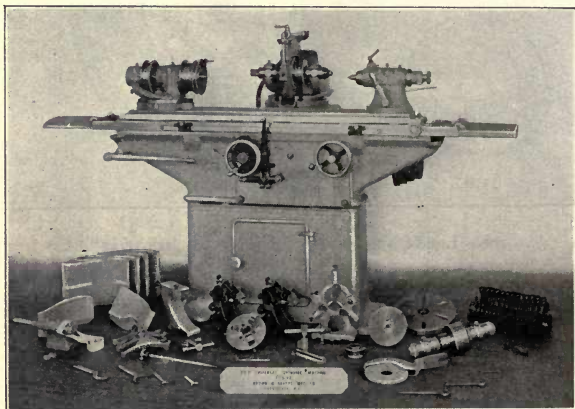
Brown & Sharpe 12x30-inch universal grinding machine.
